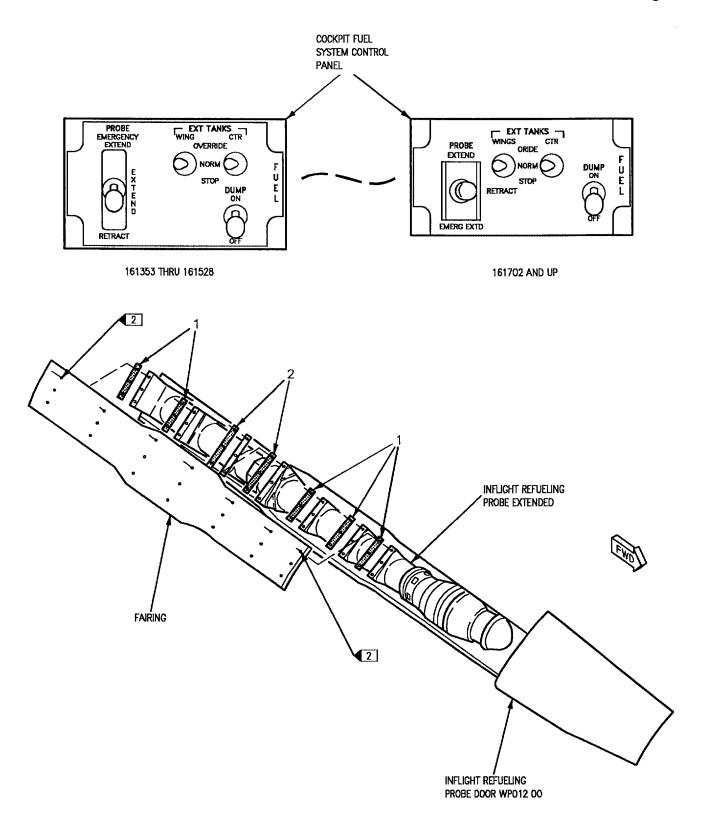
Replacement of Fairing Assembly (Sheet 1)
